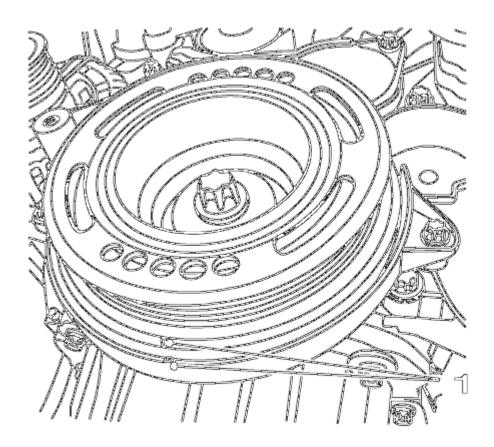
View Of Crankshaft TDC Position Courtesy of GENERAL MOTORS COMPANY
